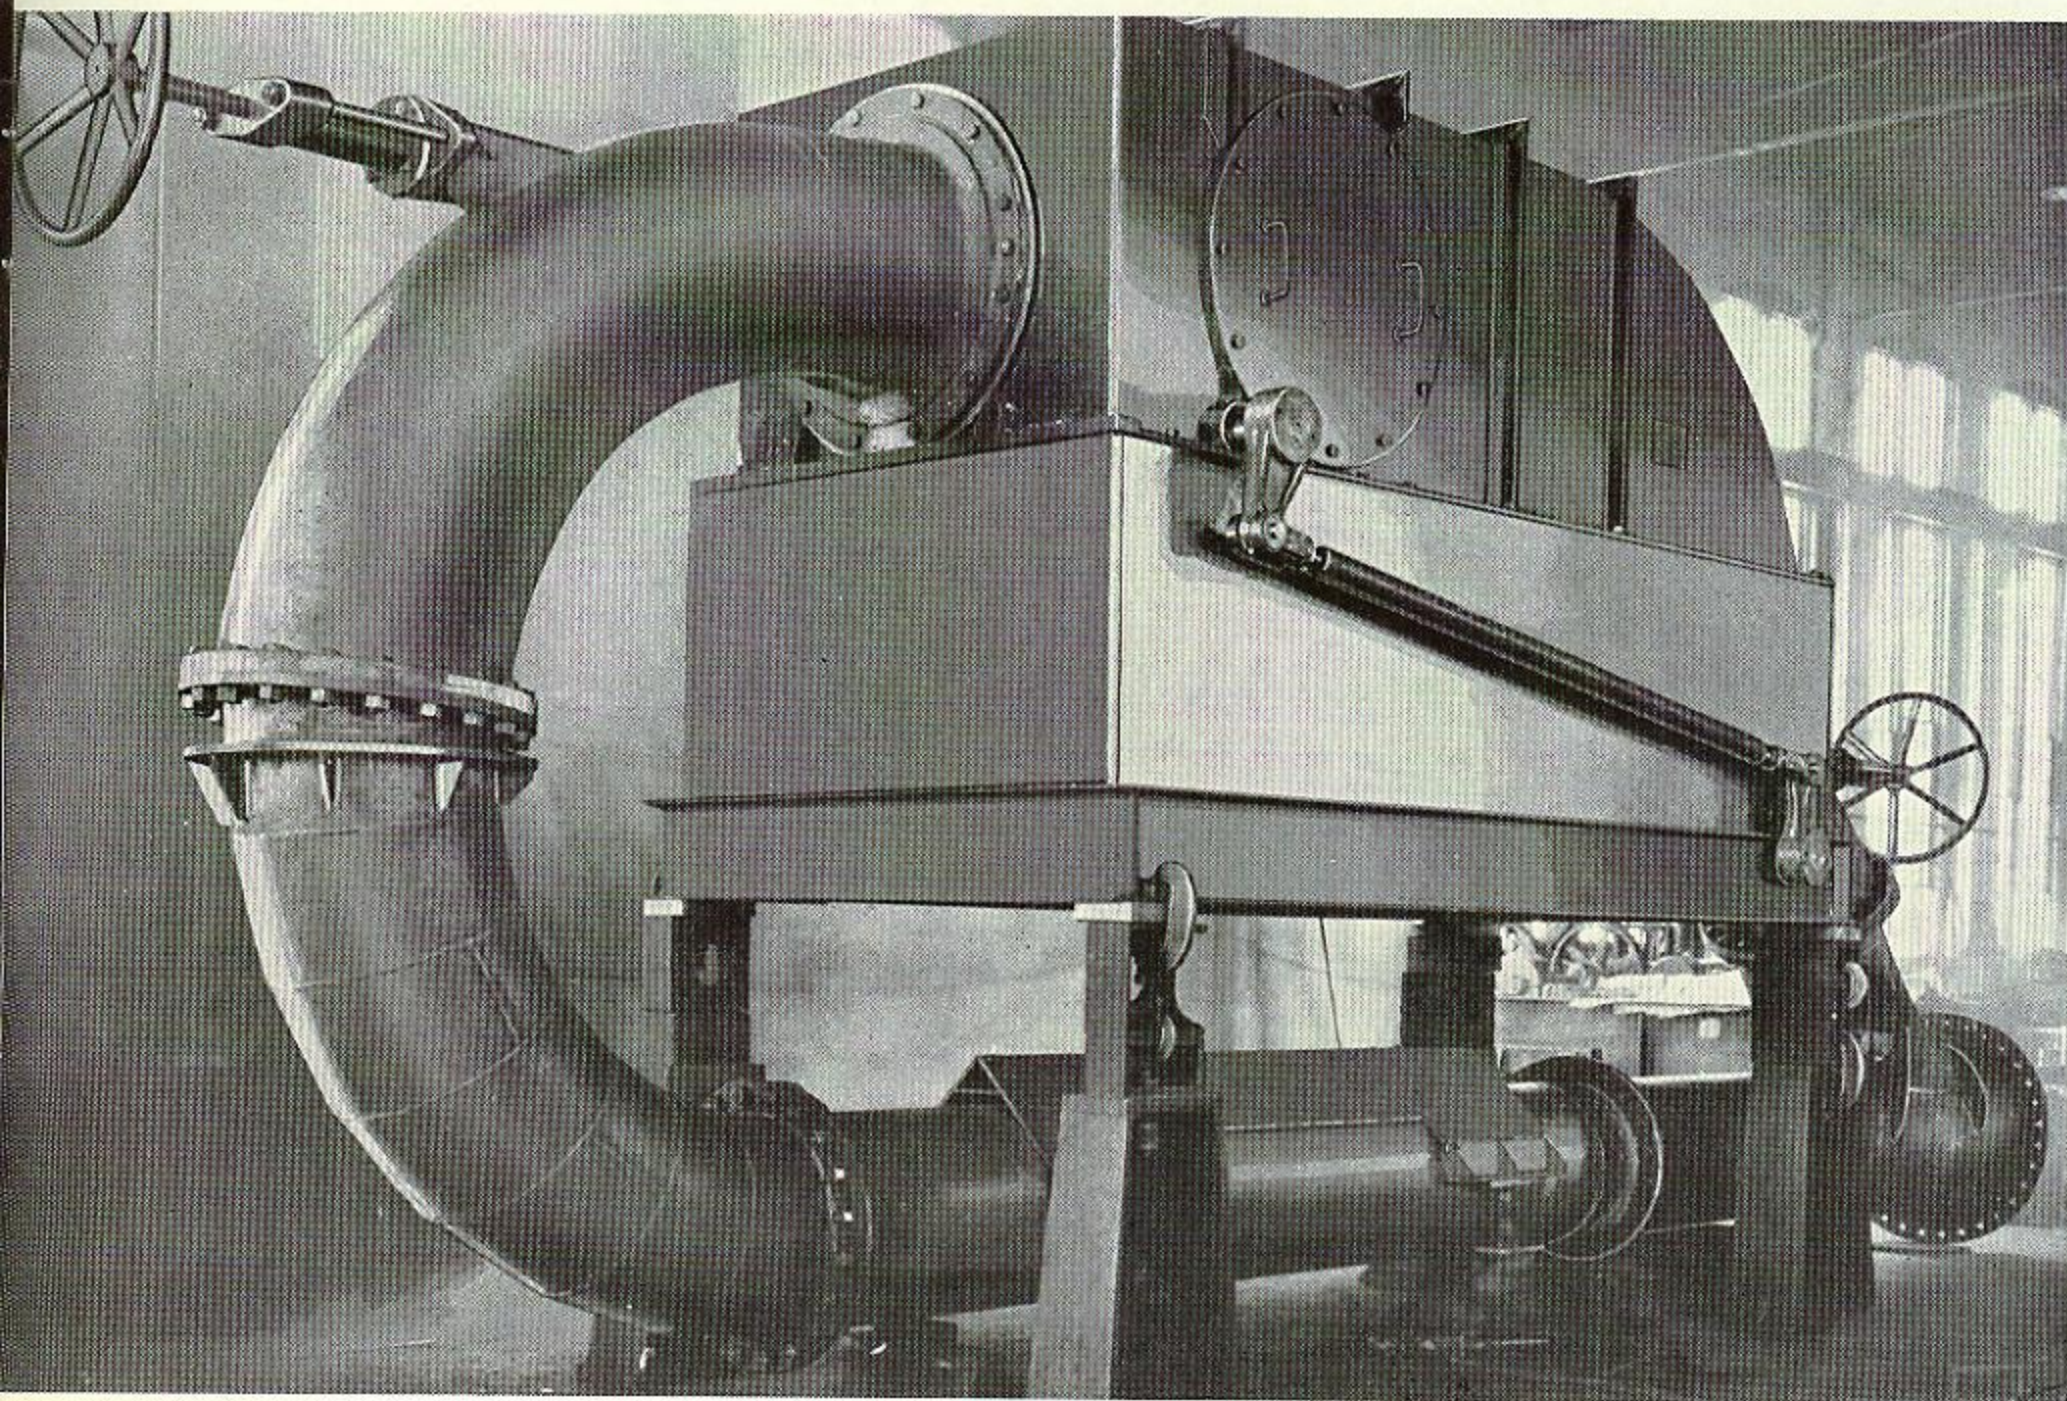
Side view showing turbine casing with double jet construction and piping arrangement.
